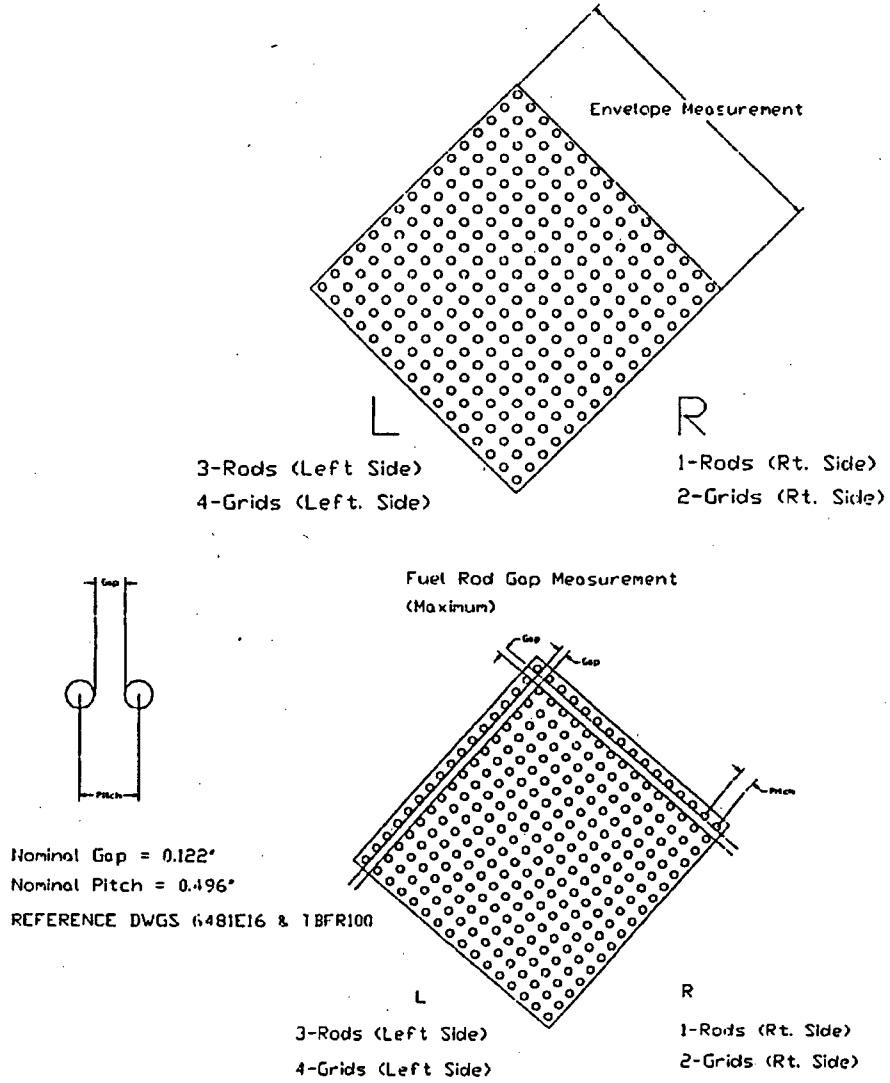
Measurements Made on QTU-1 Fuel Assemblies Before and After Drop Tests
